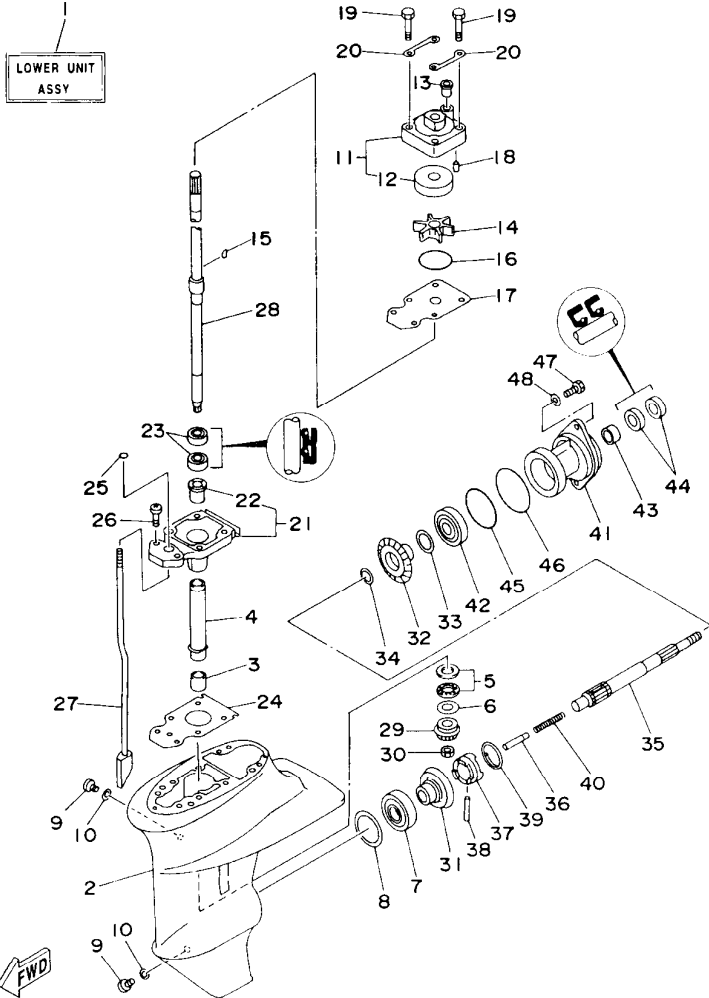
LOWER CASING. DRIVE 1 IMPULSOR E INFERIOR 1
